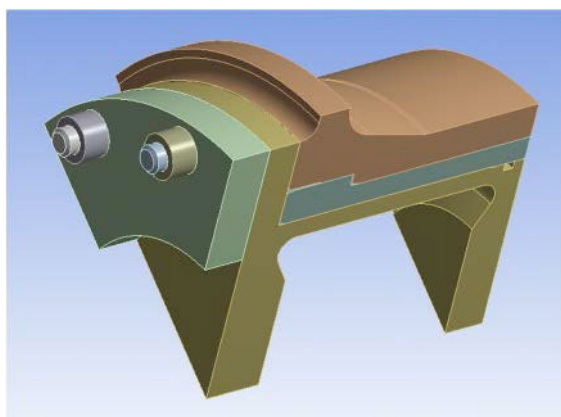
Final head assembly design with reinforcement ring, extended studs of higher material grade
